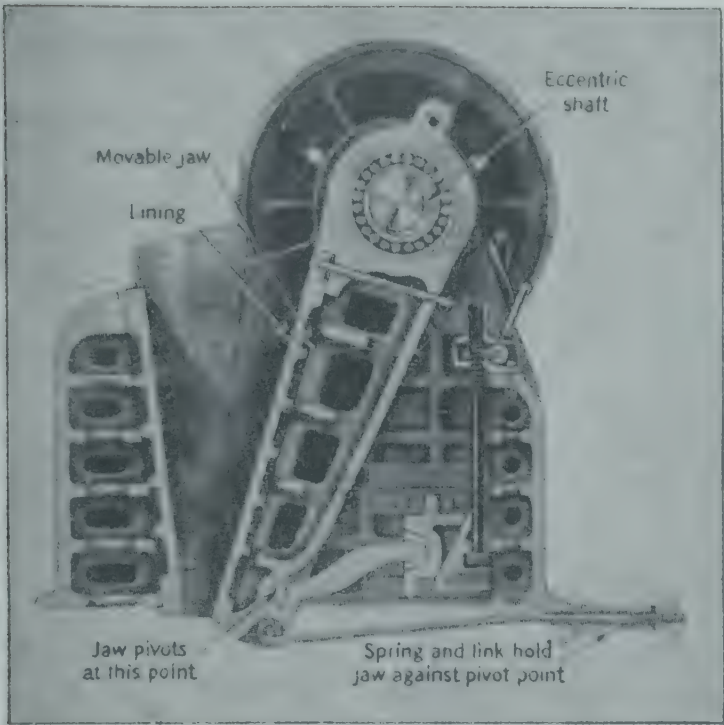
Sectional drawing of Universal streamlined roller-bearing jaw crusher. (Universal Engineering Corp.)
